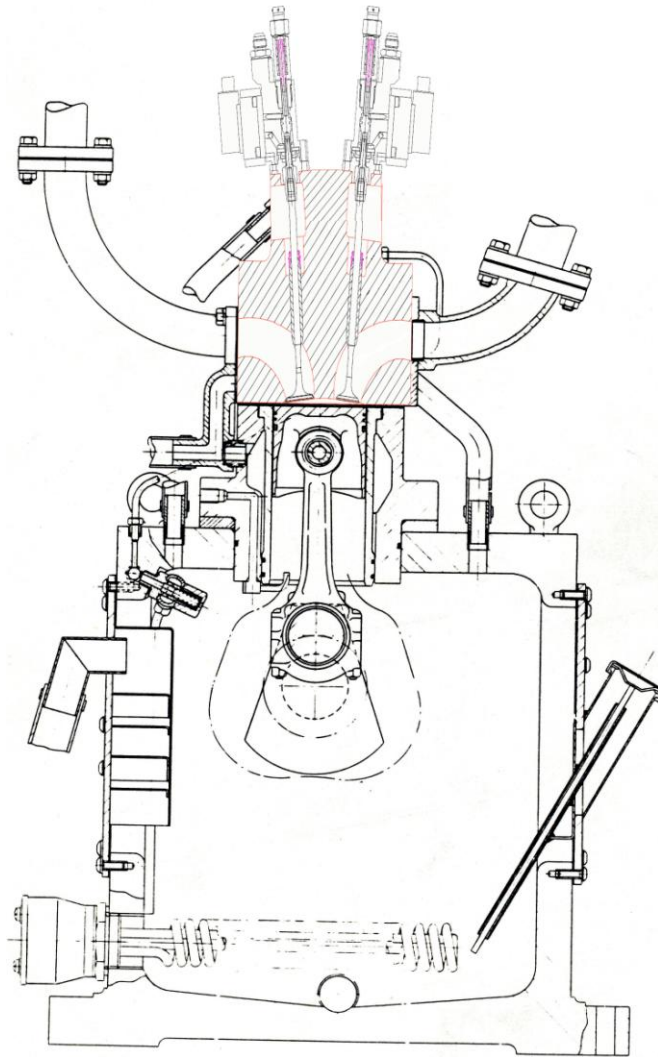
Cross section of the Ricardo Hydra engine with the AVT cylinder head installed on it.
